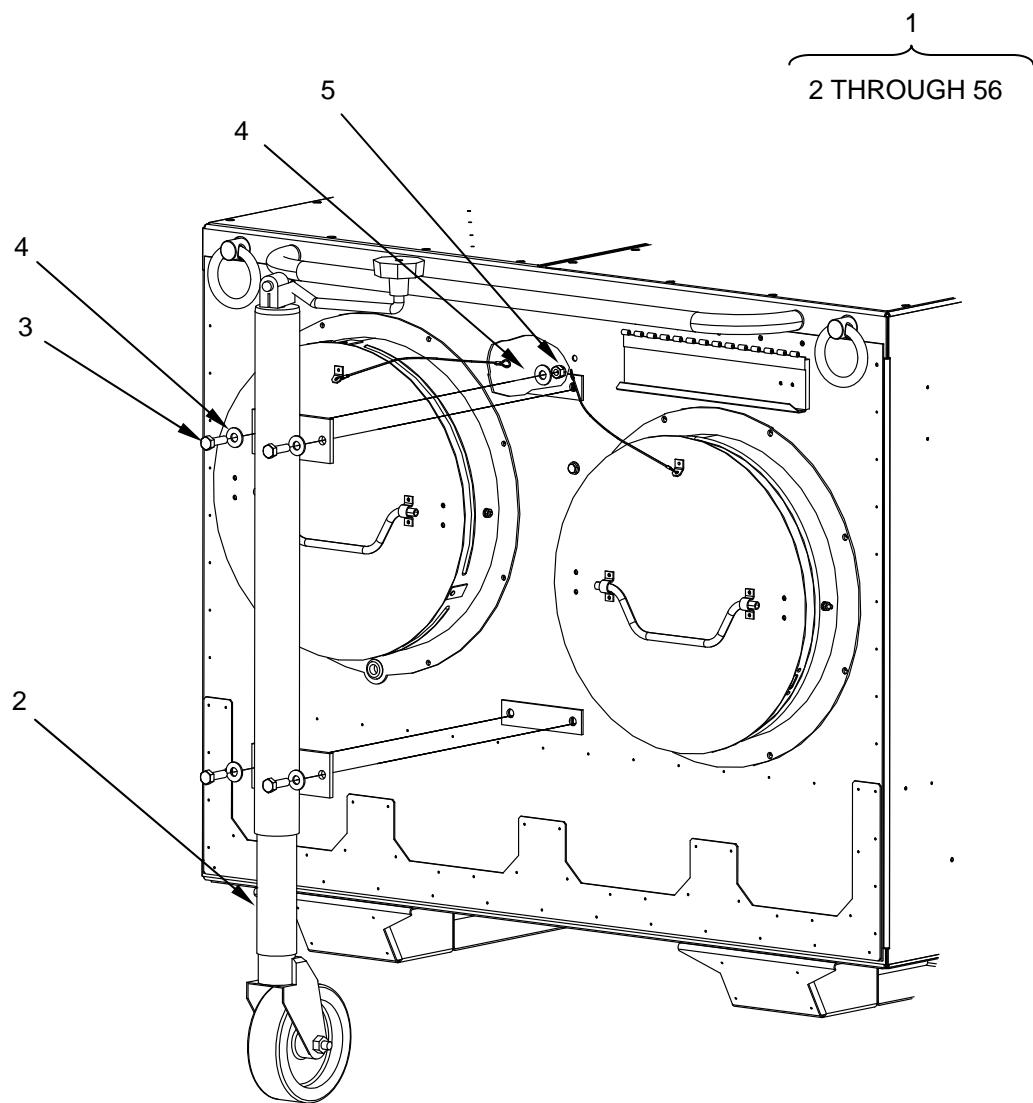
Cabinet Assembly (Assembly, Jack) (Sheet 1 of 8).
